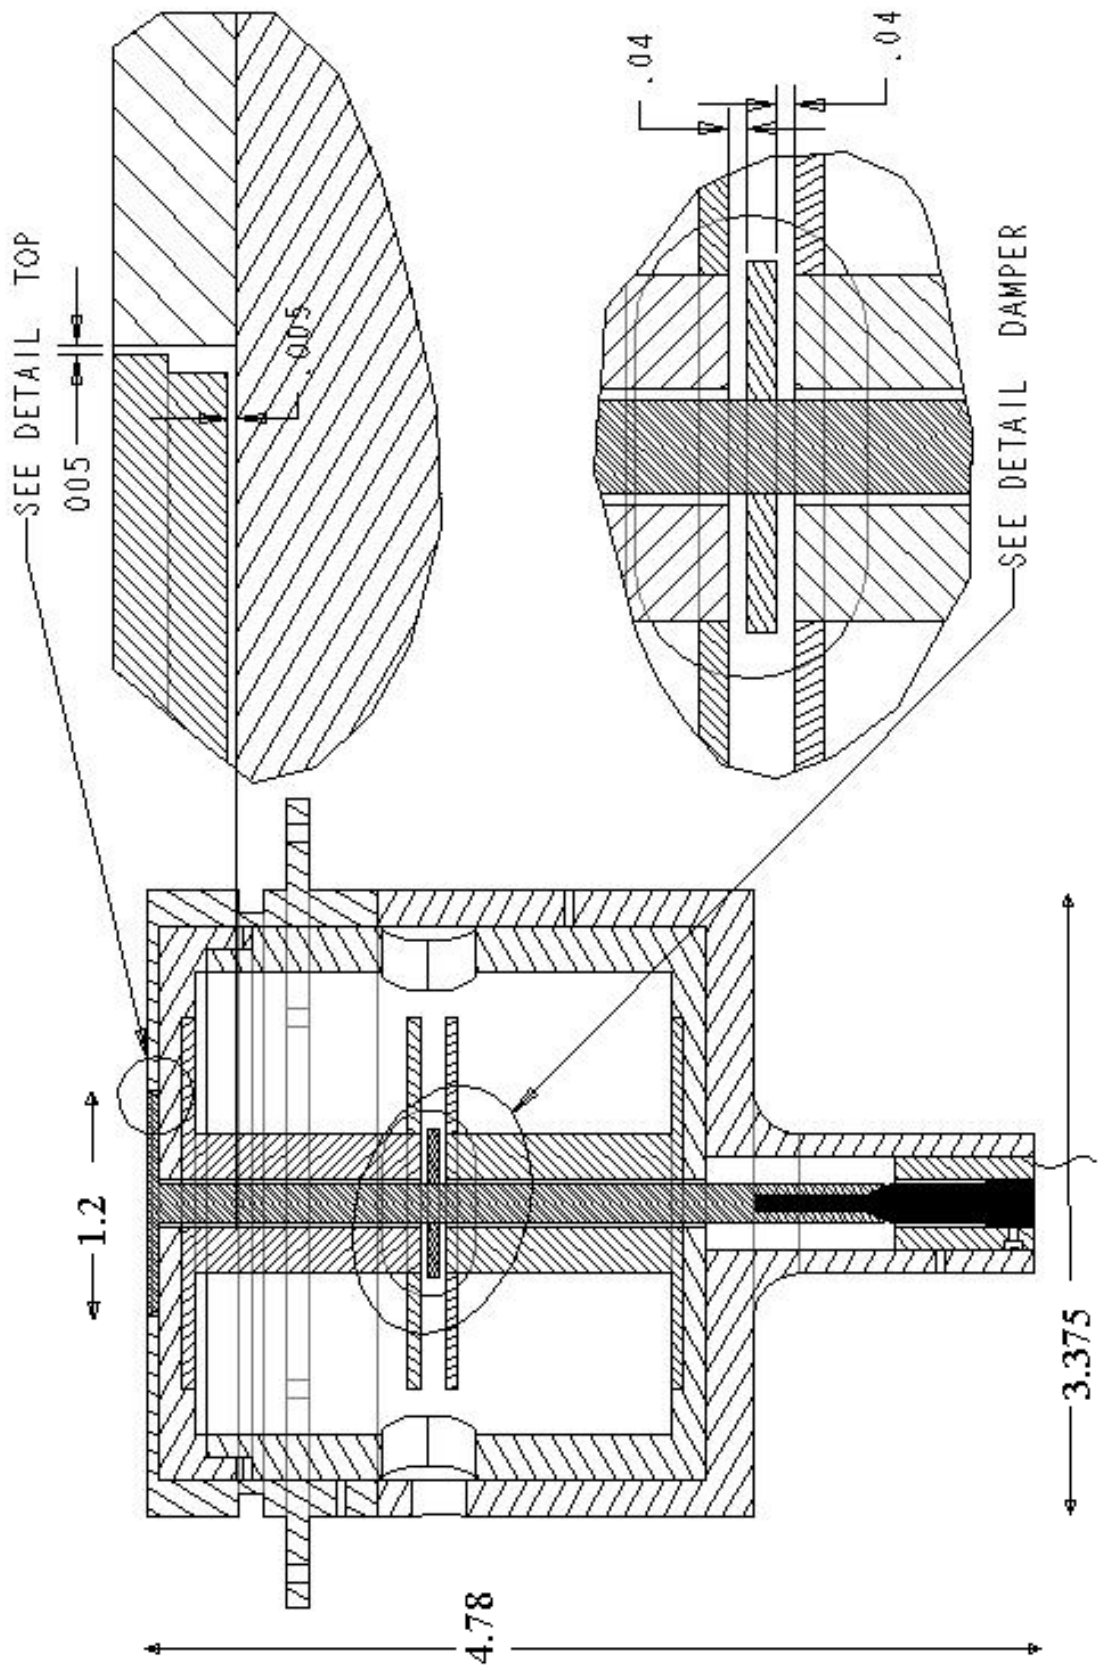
Dimensions of Third Skin Friction Gage Prototype
